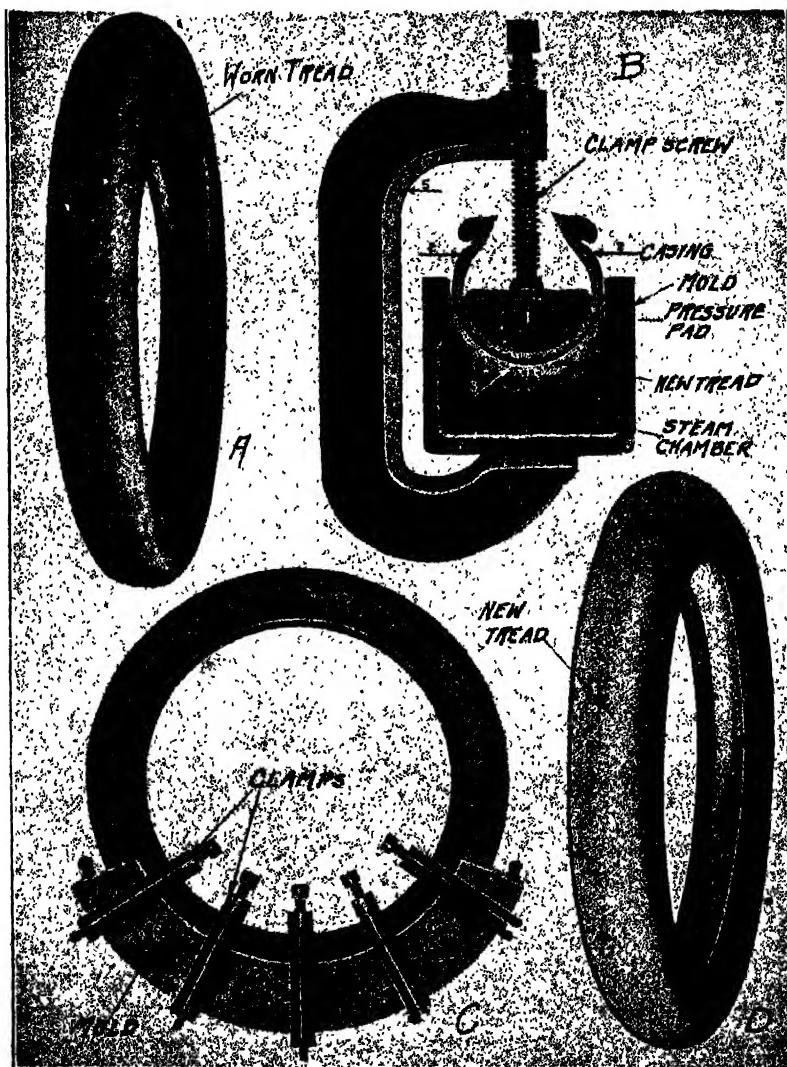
Showing Molds, Clamps and Pad Used for Retreading a Tire by the Dry Cure Process.
